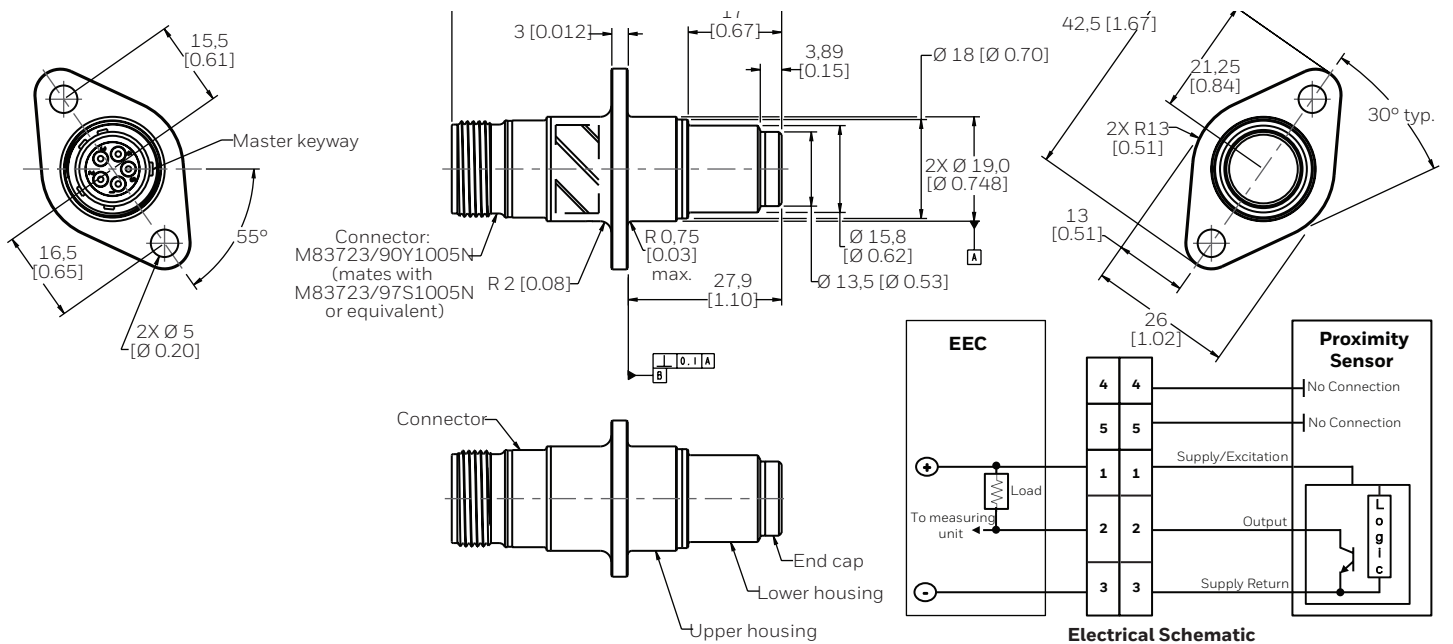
HAPS SERIES: CYLINDRICAL, FLANGED HOUSING WITH M83723/90Y1005N CONNECTOR mm [in]
